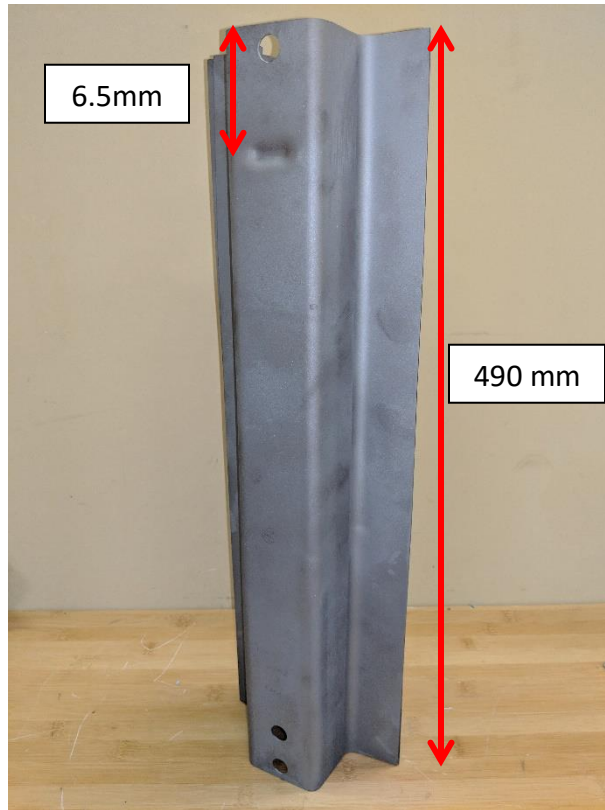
The fold initiator (dimple) on an axial crush hat section
